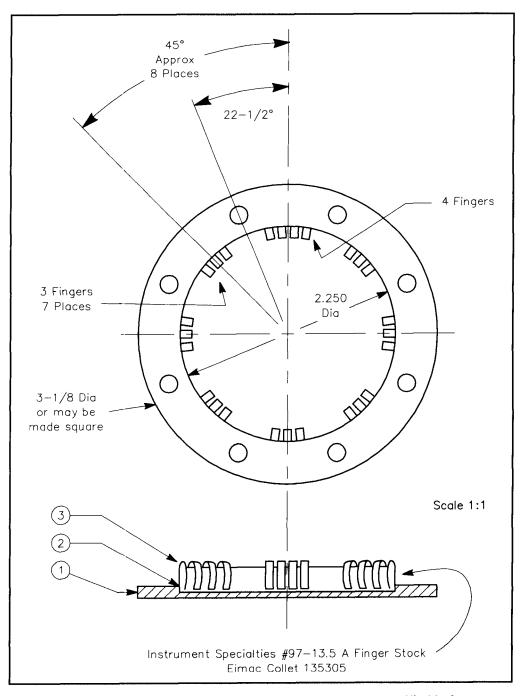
The tube socket finger stock or Eimac collet must be modified before installation. Remove fingers as shown.
